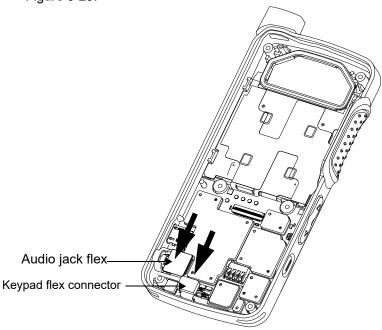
Audio jack flex connector and keypad connector re-assembly
